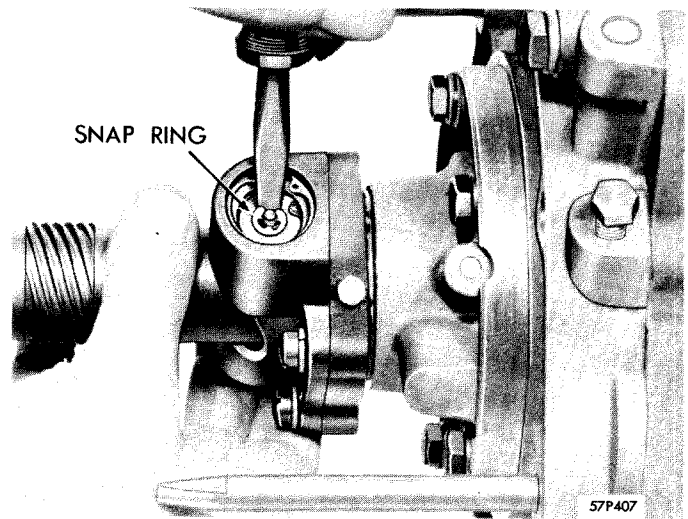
Removal and Installation of Governor Valve Shaft Snap Ring
